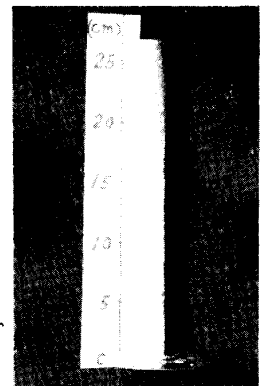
Deep Drawn Cup Fabricated by Fig. 5 Apparatus
